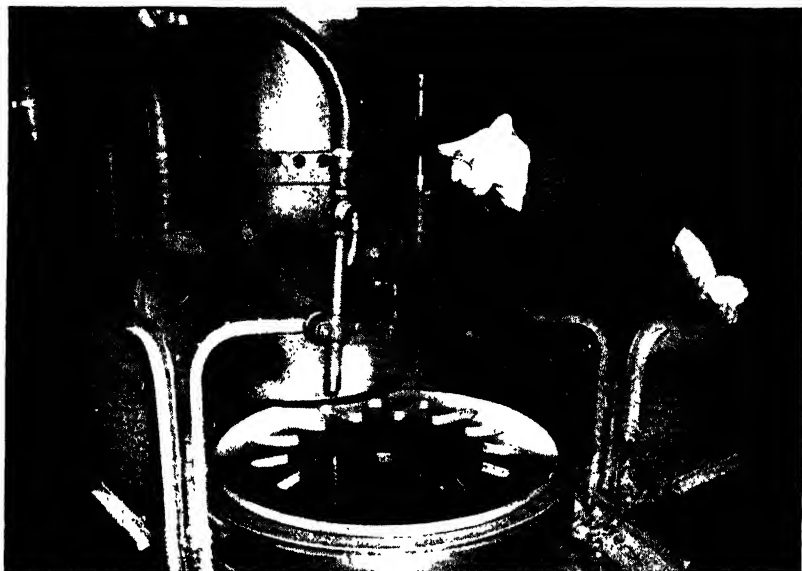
Finishing Side of Sprocket Wheel for Tank
